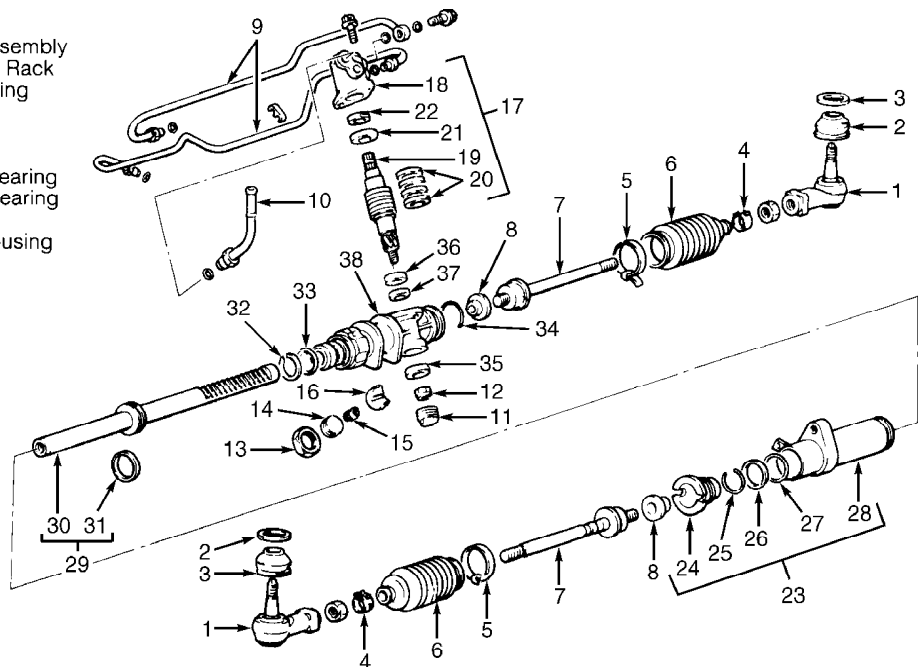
Exploded View Of Power Rack & Pinion Assembly (Typical)
